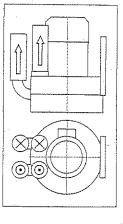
2BH1840-7L... (two-impelfer pump-motor unit with double-flow design)
